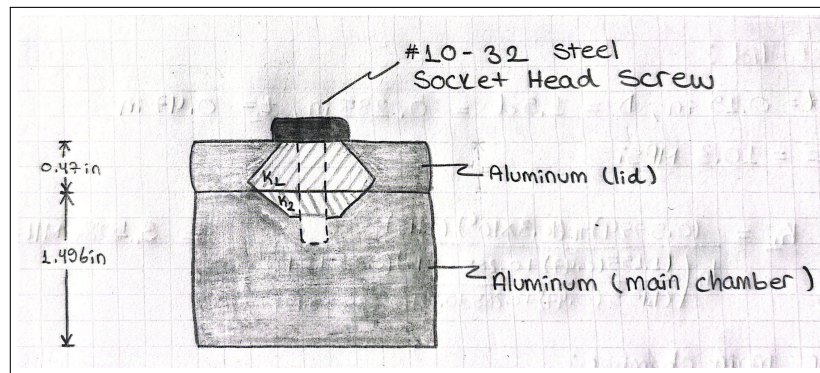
Steel socket head screws fastening an aluminum lid and aluminum main chamber.
